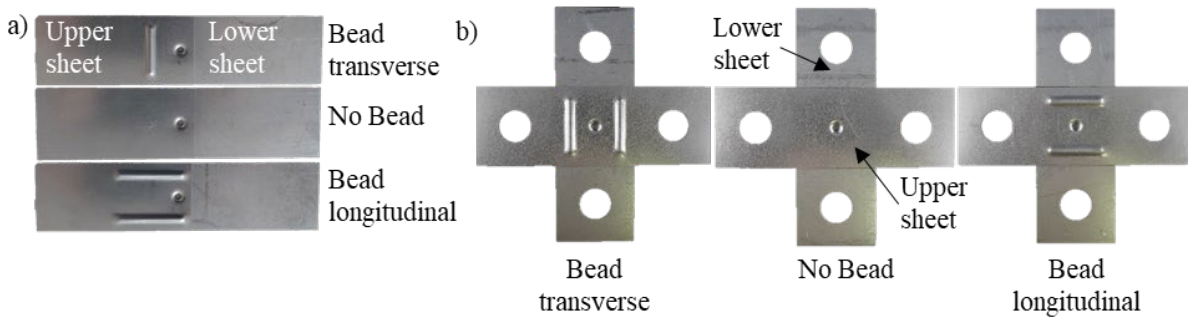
Specimen for a) Shear tensile test, b) Head tensile test in the variants no bead, bead longitudinal and bead transverse
